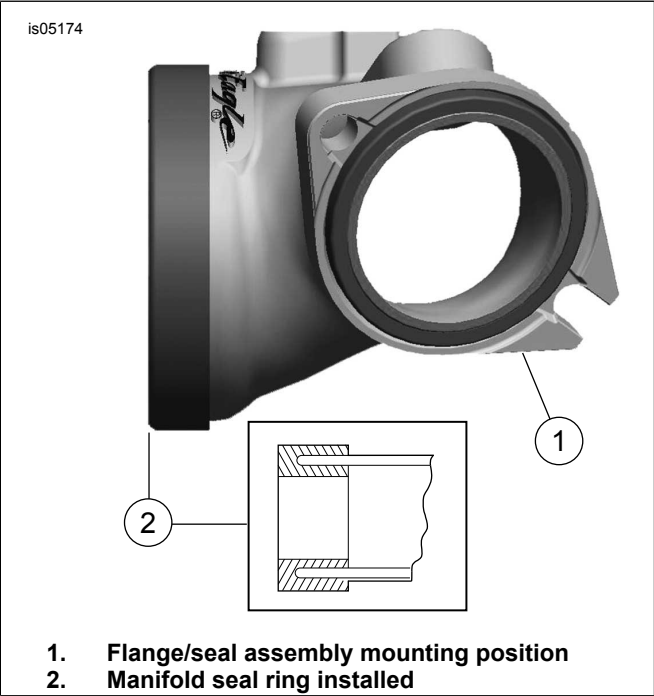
Manifold Seal Ring and Flange/Seal Assembly
